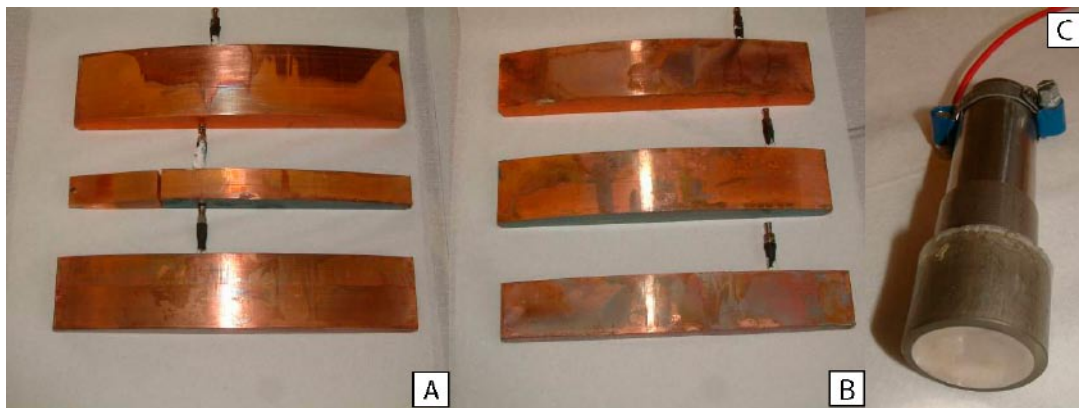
Weld samples cut into three parts (A: EBW, B: FSW) and FSW tool for electrochemical measurements.
